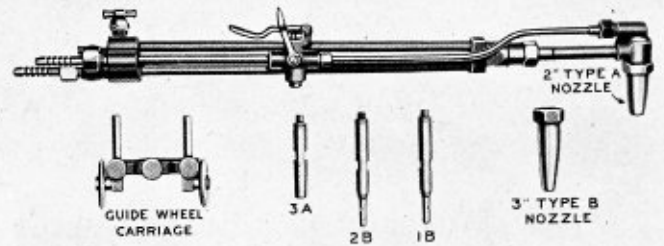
Special Rivet and Staybolt Cutting Torch
